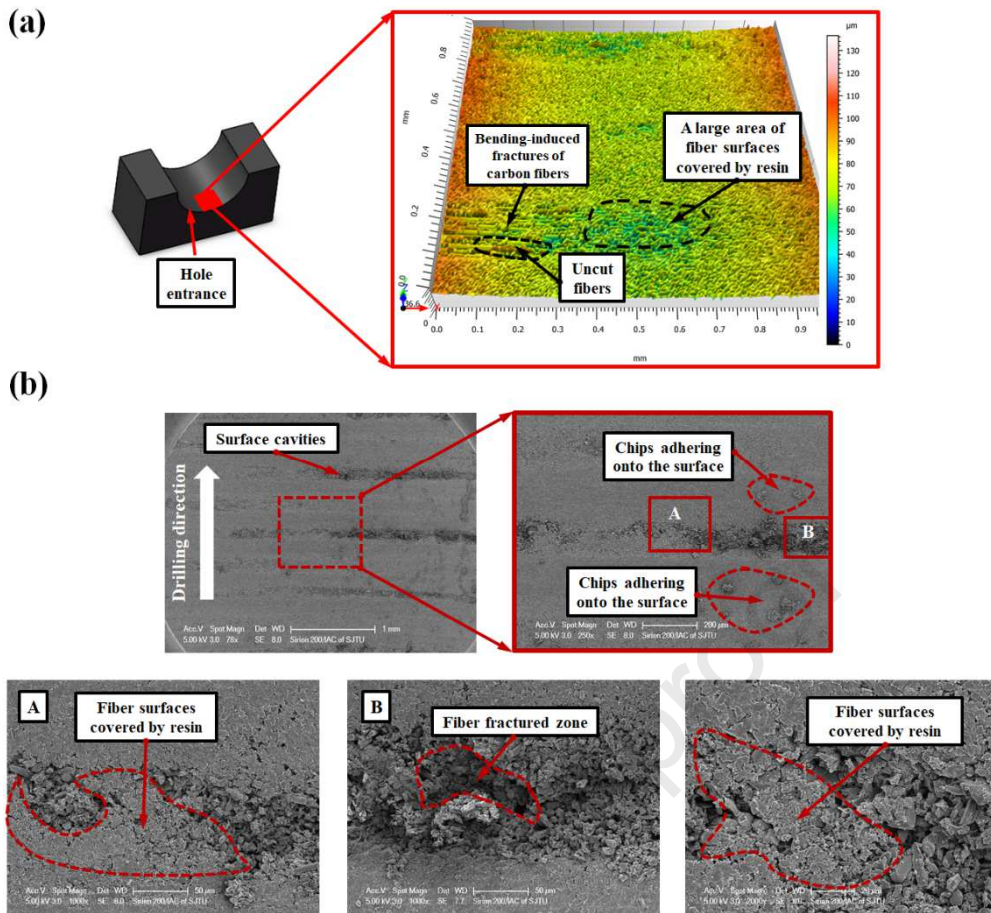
(a) CLSM and (b) SEM morphologies of the 15th composite hole machined by the step drill.
